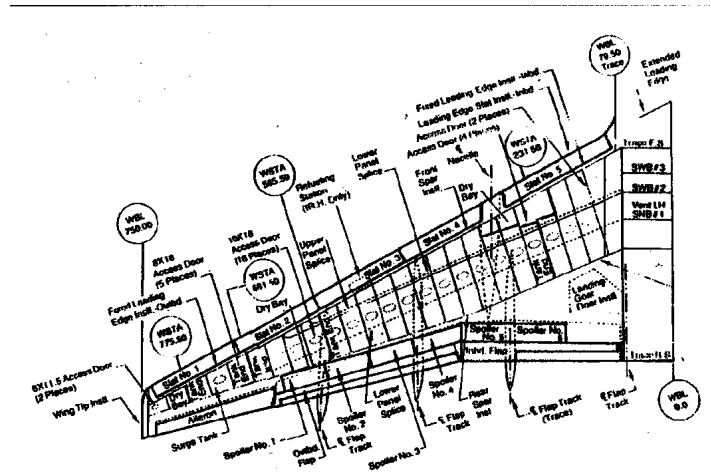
This is a detail drawing of the Boeing 757-200 outboard wing.
